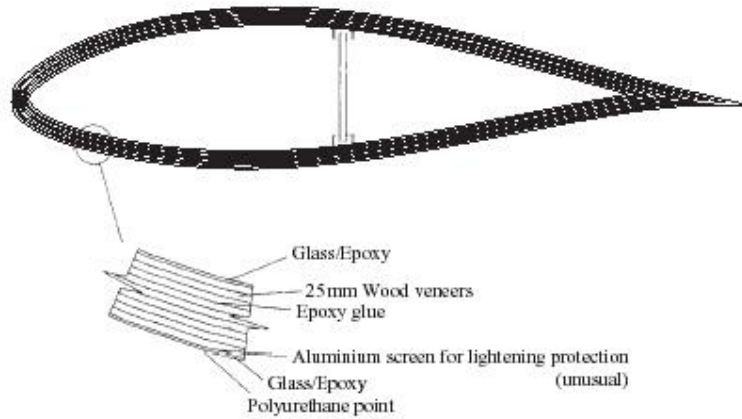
Wood/Epoxy Blade Construction Utilizing Full Blade Shell
